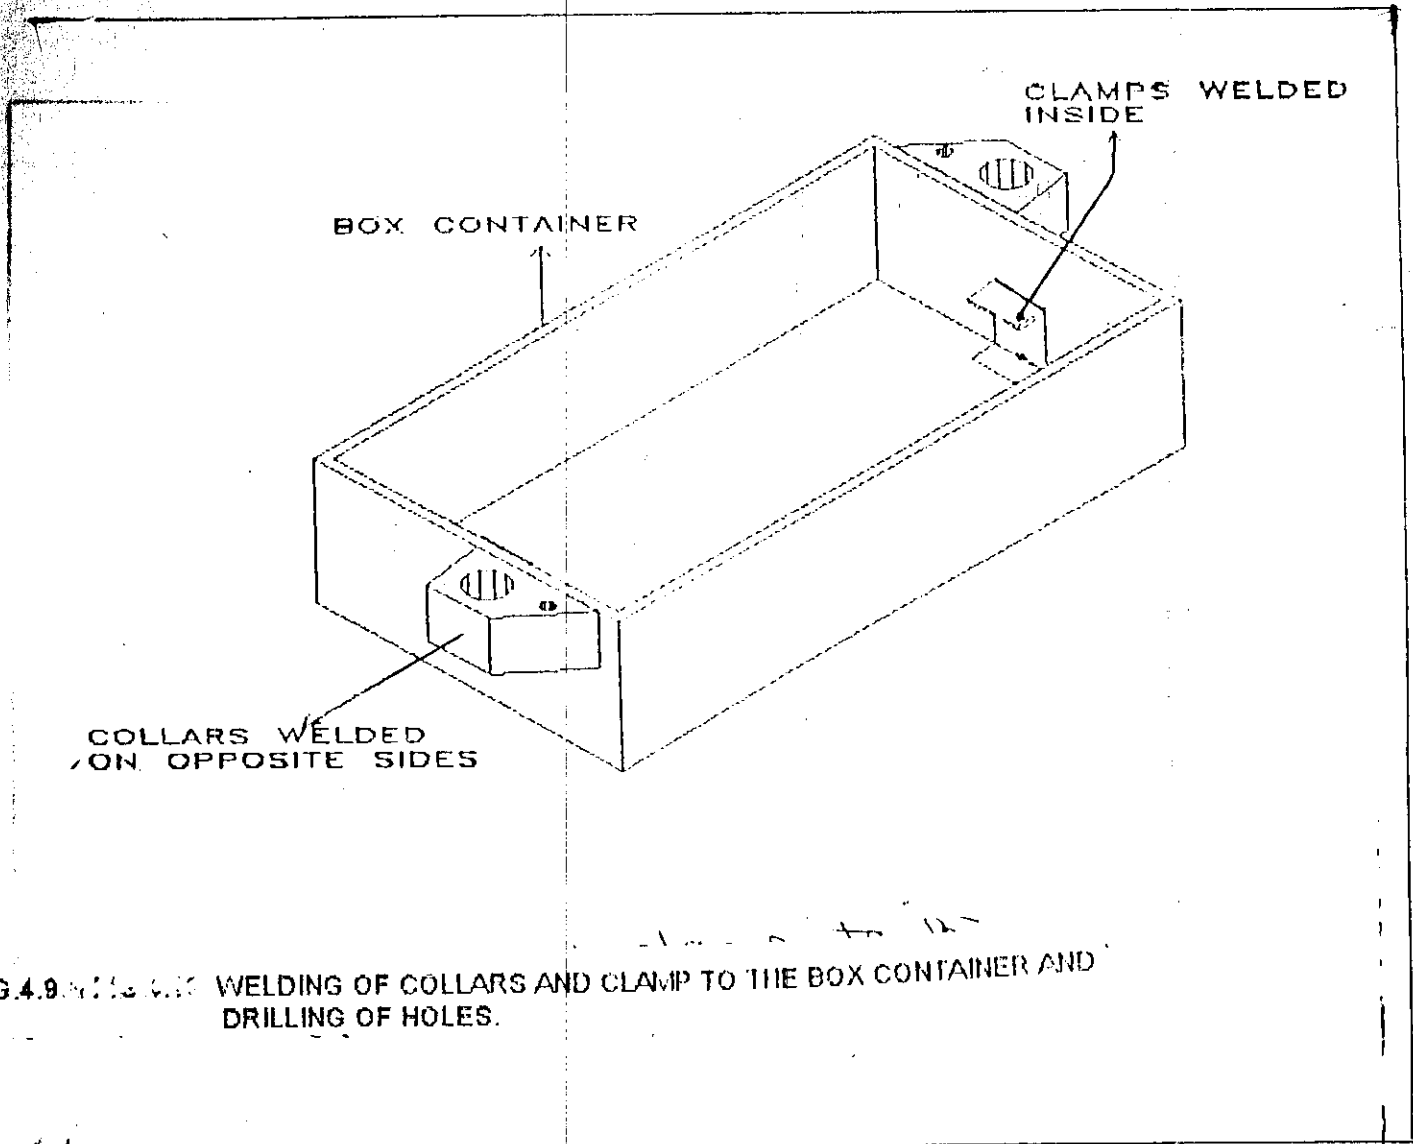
WELDING OF COLLARS AND CLAMP TO THE BOX CONTAINER AND DRILLING OF HOLES.
